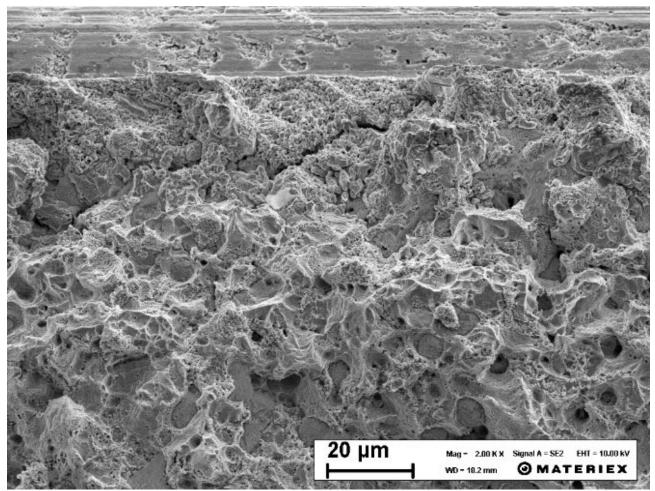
Overload fracture at the crack tip of the leaking fitting (SEM).
